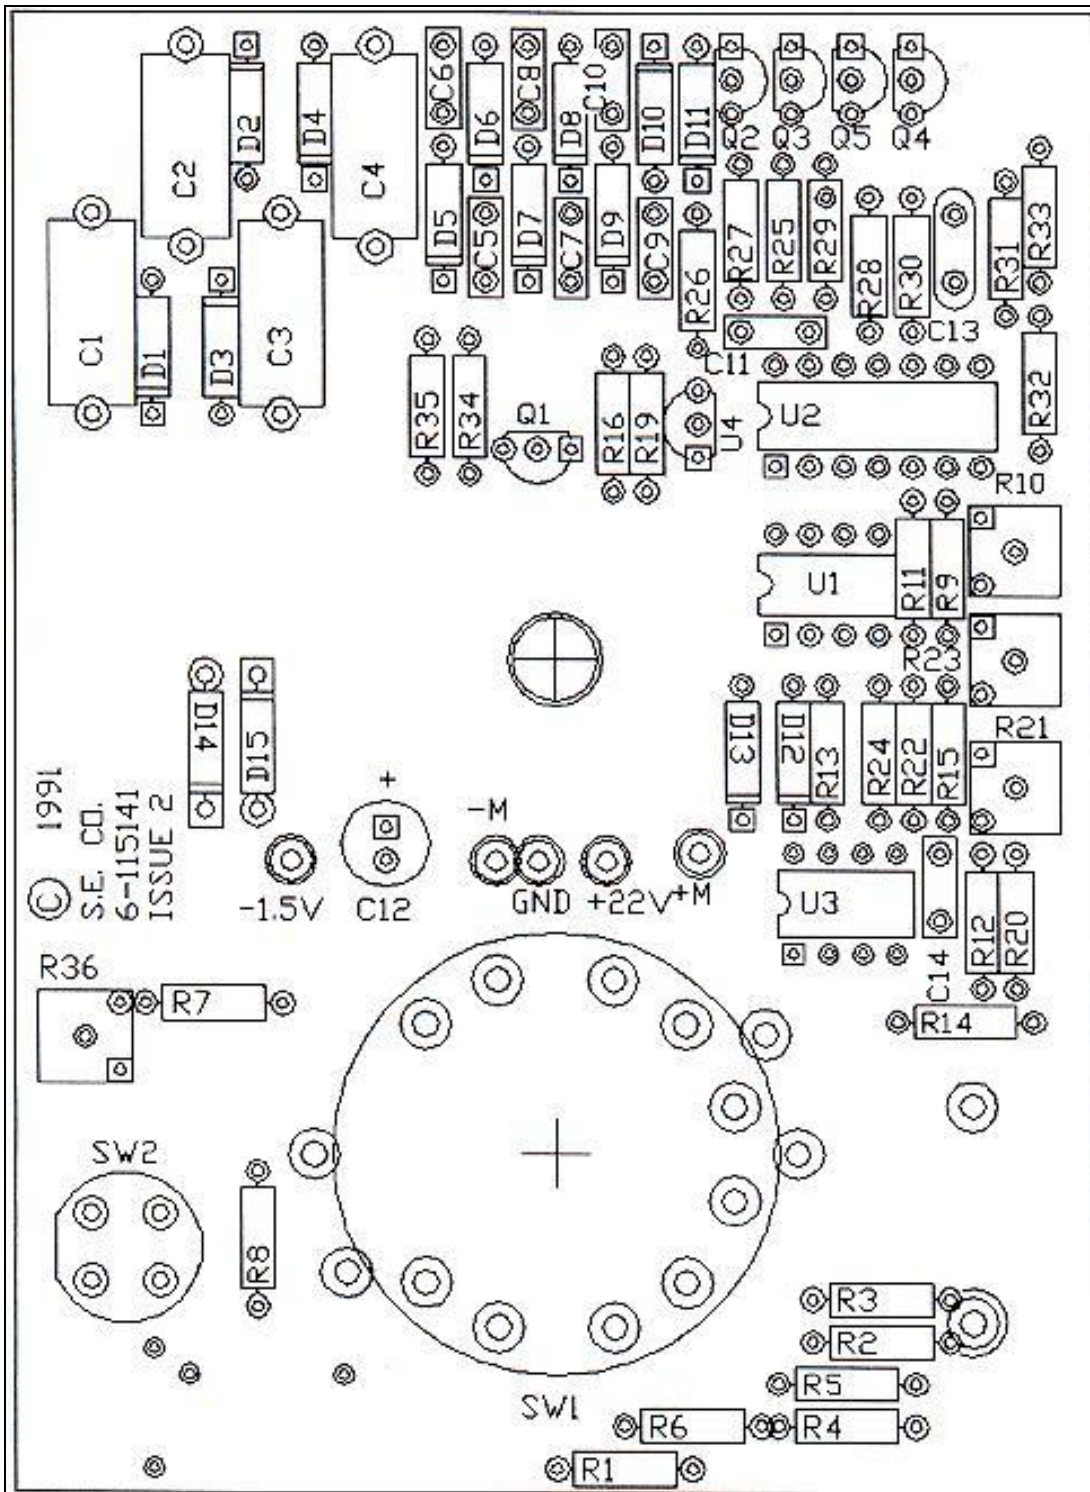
Main PC Board Assembly - Model T00456 3M 701 (Issue 2)
